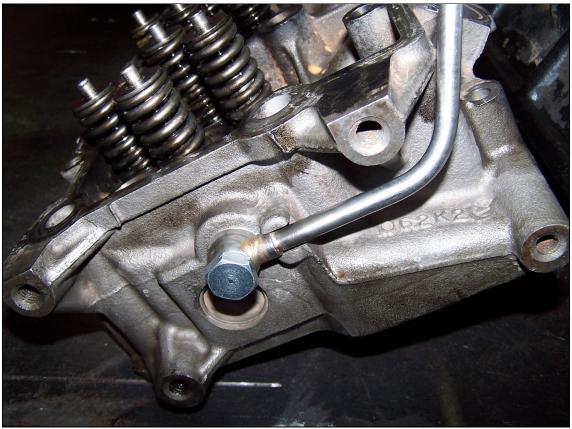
Rear of Driver Side Head with Aftermarket Fuel Line
